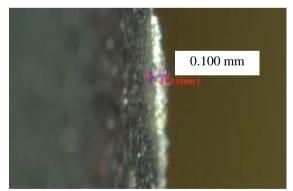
Biggest Burry dimension at material 1.0 mm
